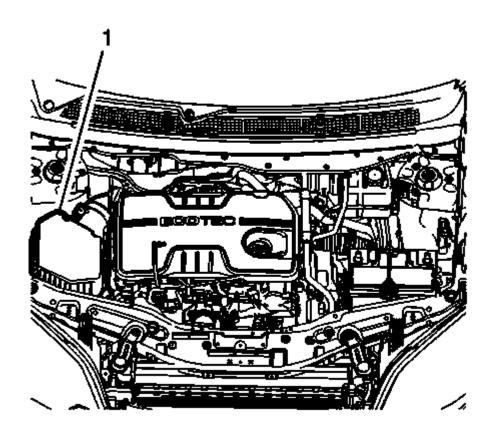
Throttle Body Courtesy of GENERAL MOTORS COMPANY
